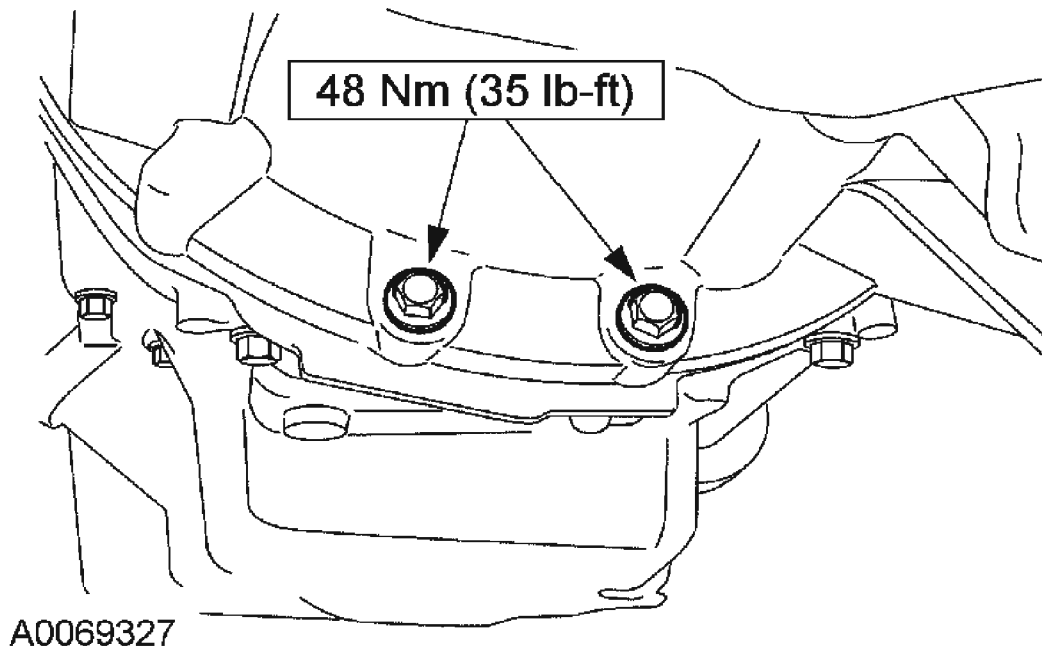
Installing Lower Engine-To-Bell Housing Bolts
